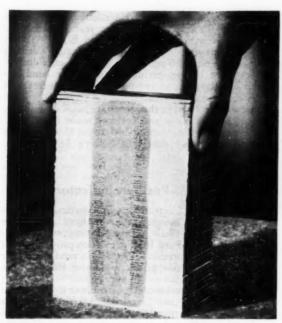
Shown are 89 sheets of titanium that have been resistance spot-welded in solution to form a solid stack 6 in thick. This process, utilizing a liquid coolant, increases capacity of available resistance-welding equipment sixfold.
